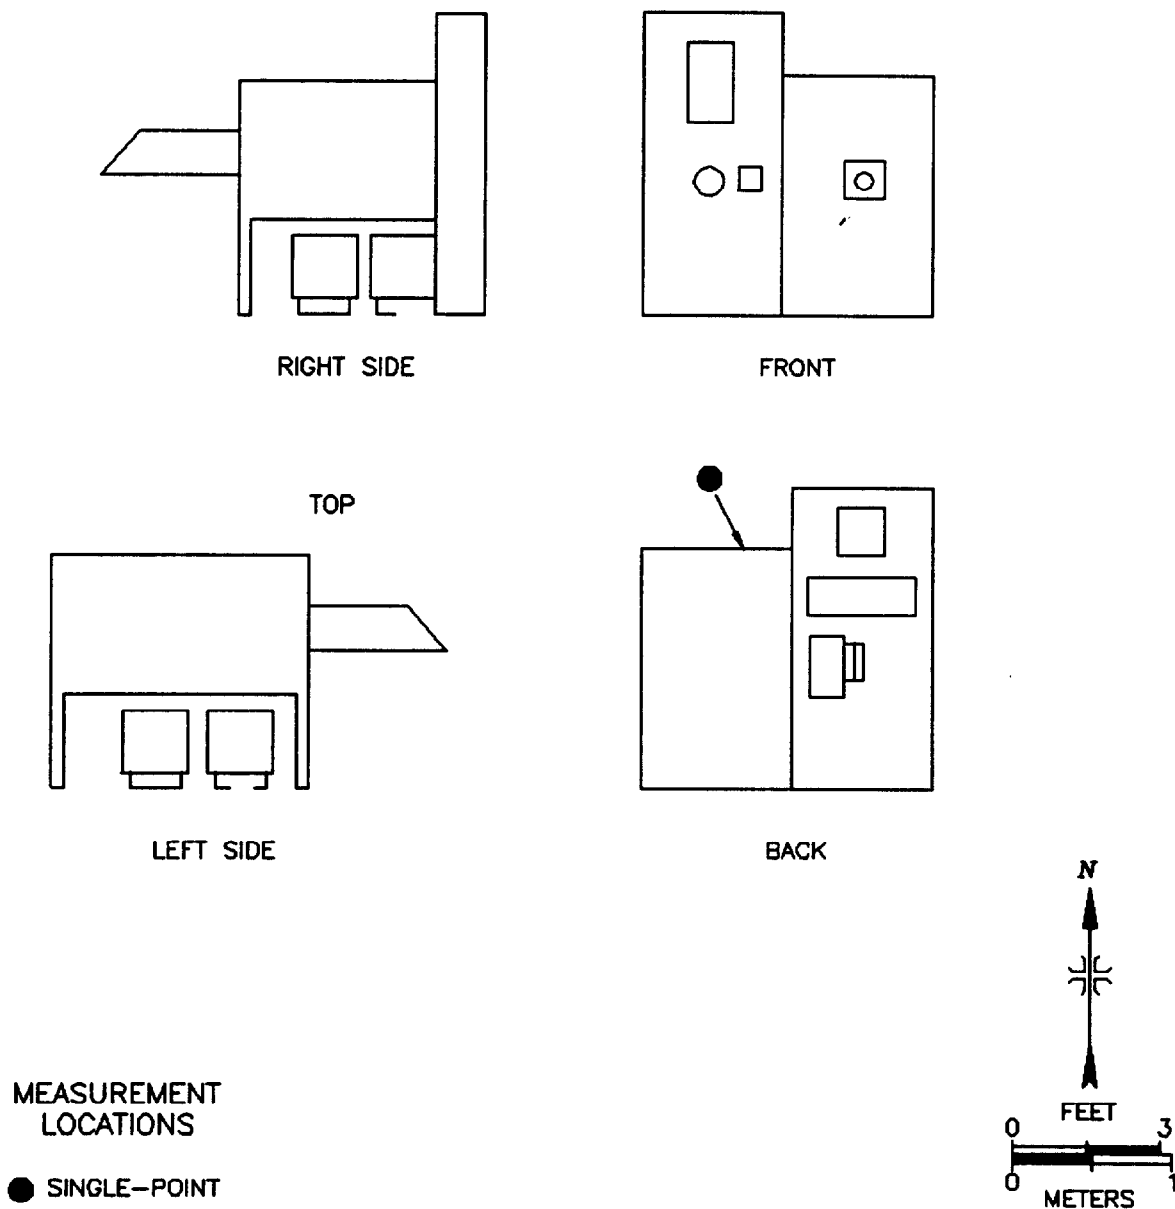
Building 30, Fabrication Room, Hydrogen Oven Equipment #50430 - Measurement Locations
